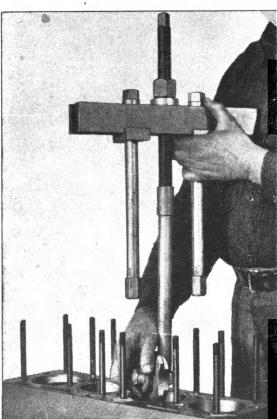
Inserting Puller into Cylinder Barrel Preparatory to Pulling. This is a Combination of Owatonna Tool Co. Tools—other Standard Tools will do as well.
